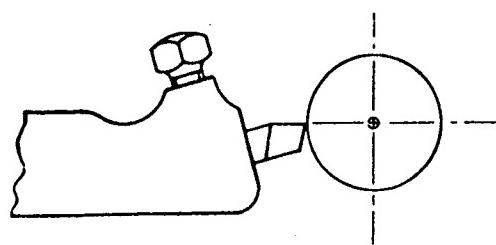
Tool Bit Set on Centre for Cutting Screw Threads
